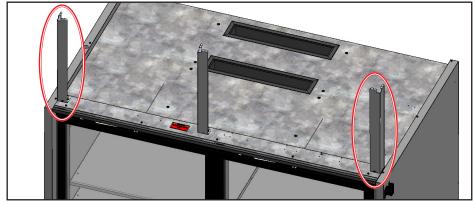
Install the shroud supports with the supports' corners aligned with the closest front corner of the unit.
